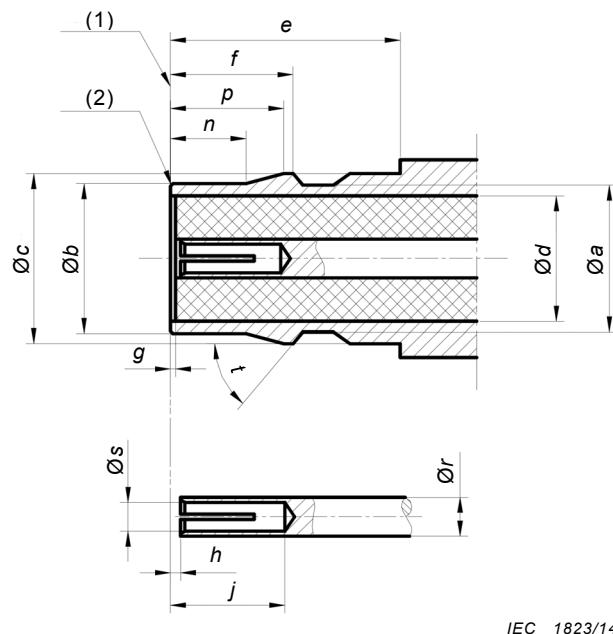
Connector with pin-centre contact (for dimensions and key, see Table 1)
